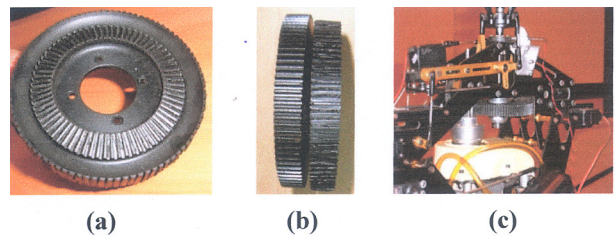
(a) Damaged Bevel Gear (b) Damaged Spur Gear (c) Manufactured Main Gear Mounted on the Mini-helicopter
